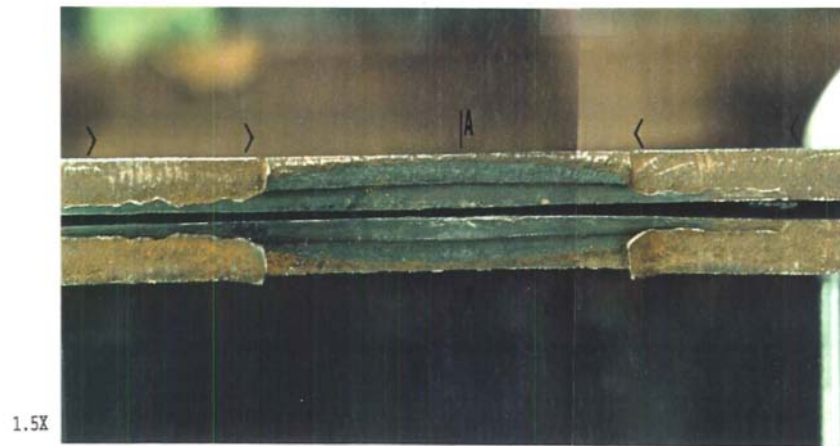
Fracture Surfaces of Fatigue Case Number 2 Anomaly
